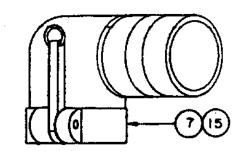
Filler/discharge assembly, 3,000 gal tank
